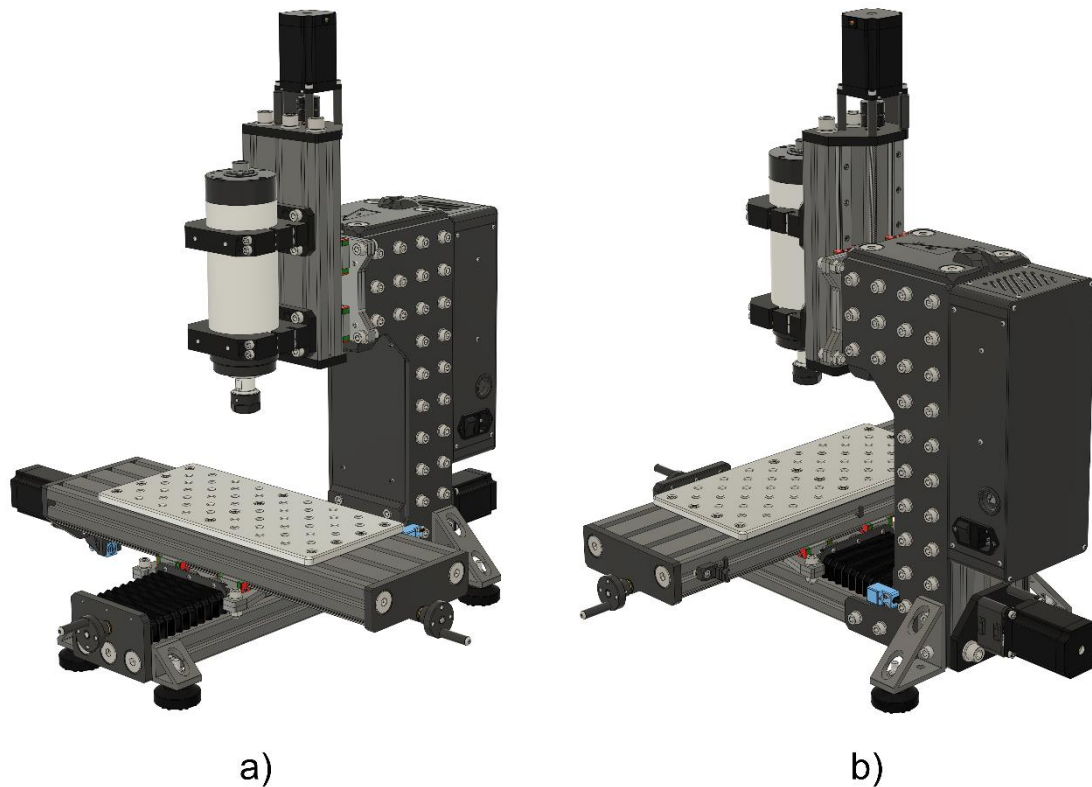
a) Front isometric view of the Mill with the electronics enclosure installed on the Z tower. b) Rear isometric view of the Mill with the electronics enclosure backpack.
